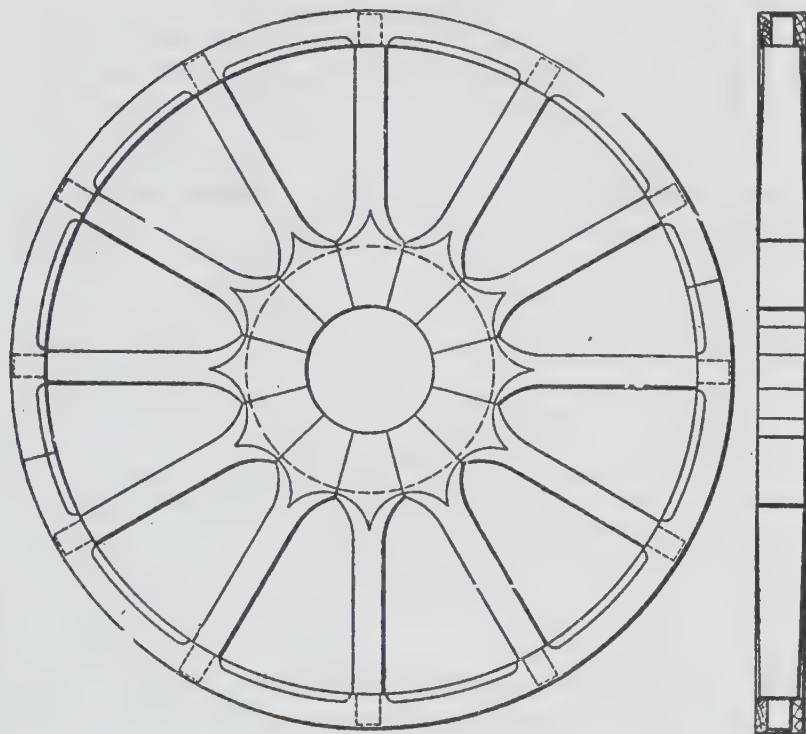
SPOKE AND FELLOE ASSEMBLY OF PLEASURE CAR WHEEL.
